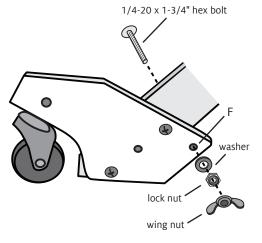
STROLLER BAR AND FRONT CASTER BLOCK
